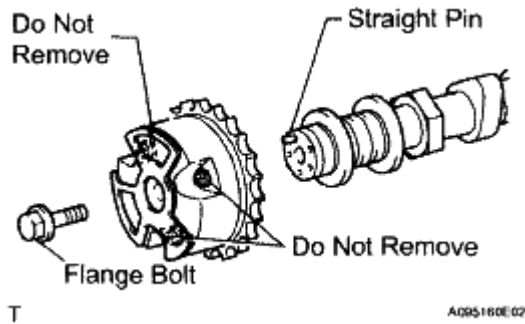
Removing Flange Bolt And Camshaft Timing Gear
